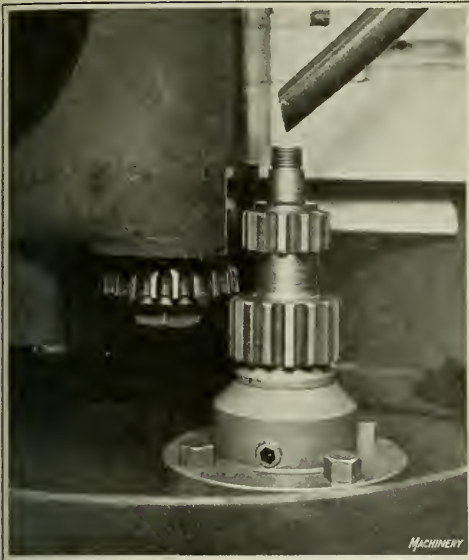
Gear Shaper which is arranged for cutting on the Push or Downward Stroke of the Cutter
